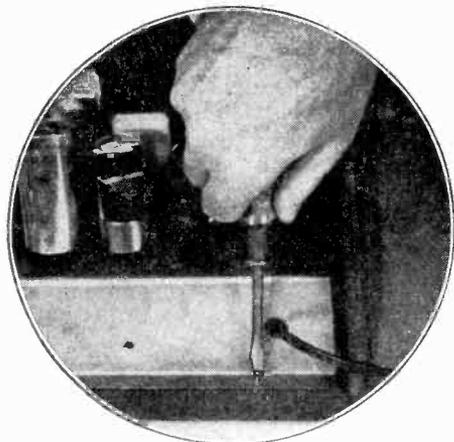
Using a medium-size screwdriver to remove the chassis hold-down screws at the back of our superheterodyne receiver.
